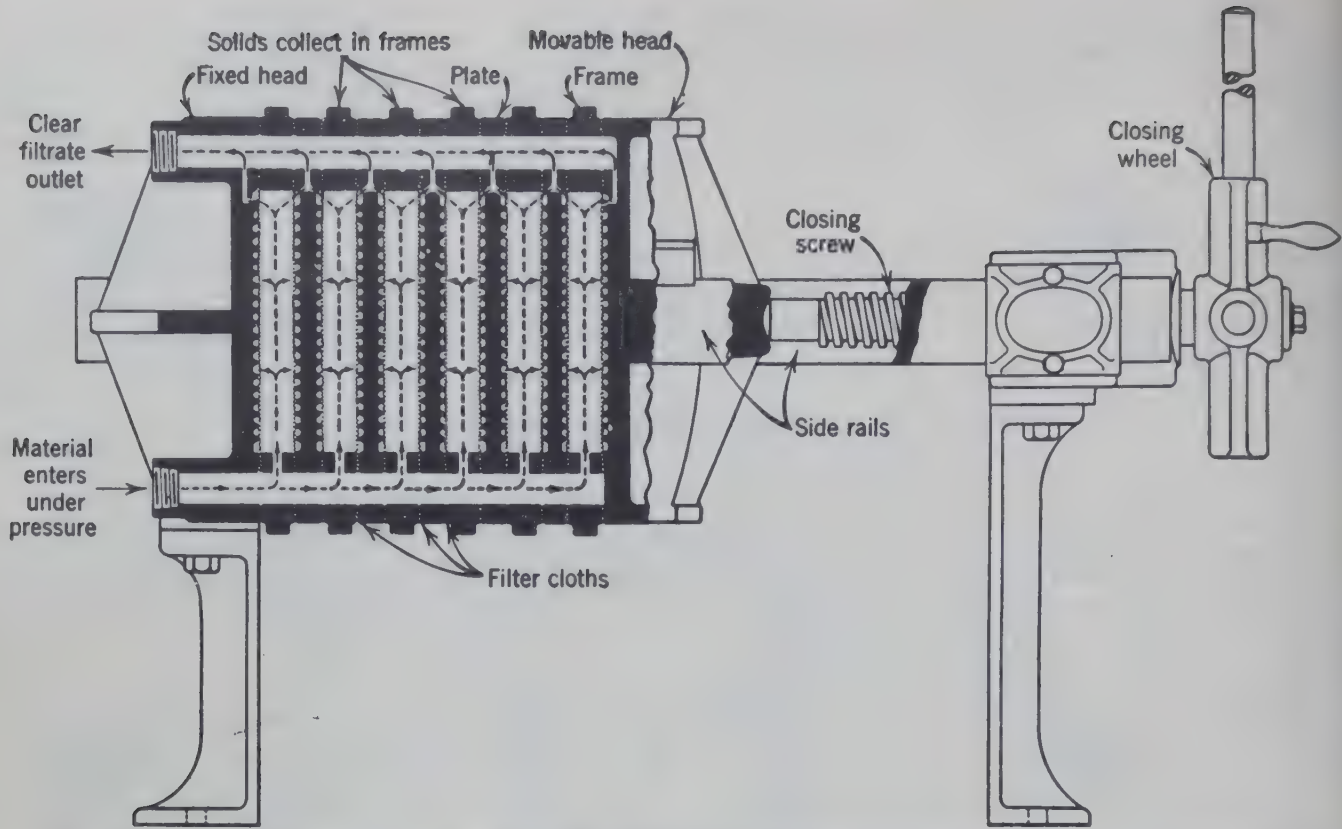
Sectional drawing of fully assembled corner-feed closed-delivery filter press. (T. Shriver and Co.)
